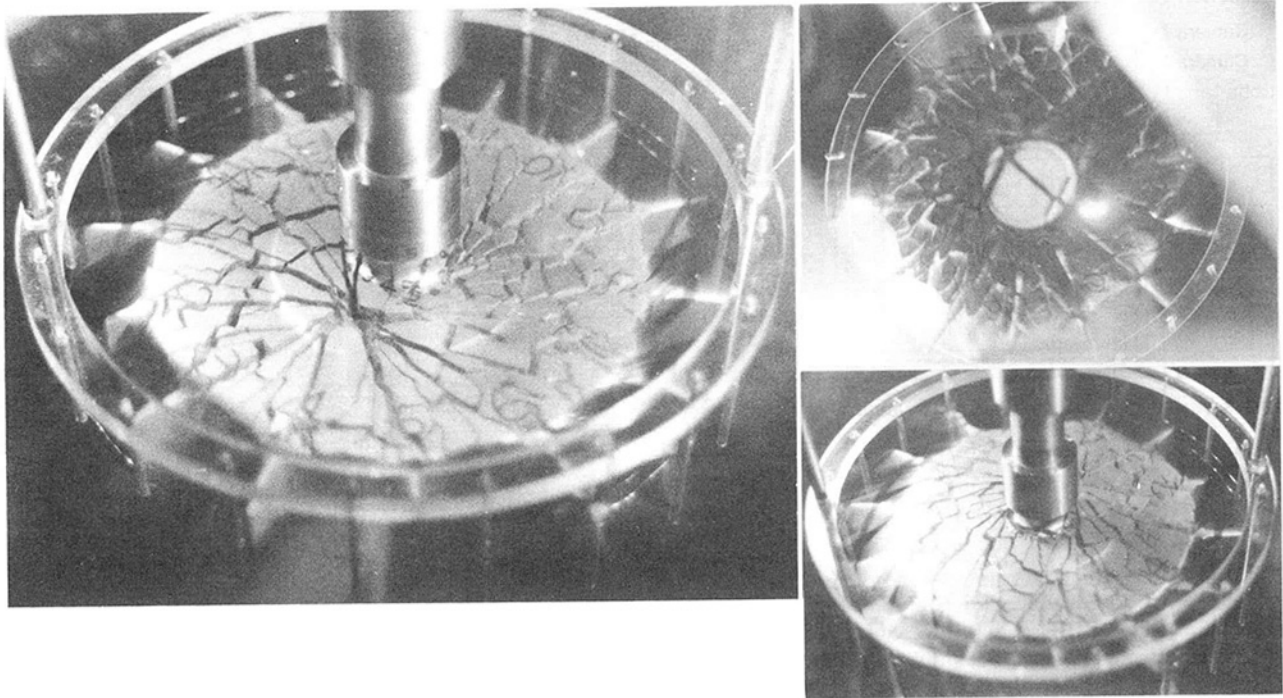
Fracture photographs of Si_3N_4 radial wheel from three directions at 90,300 rpm
